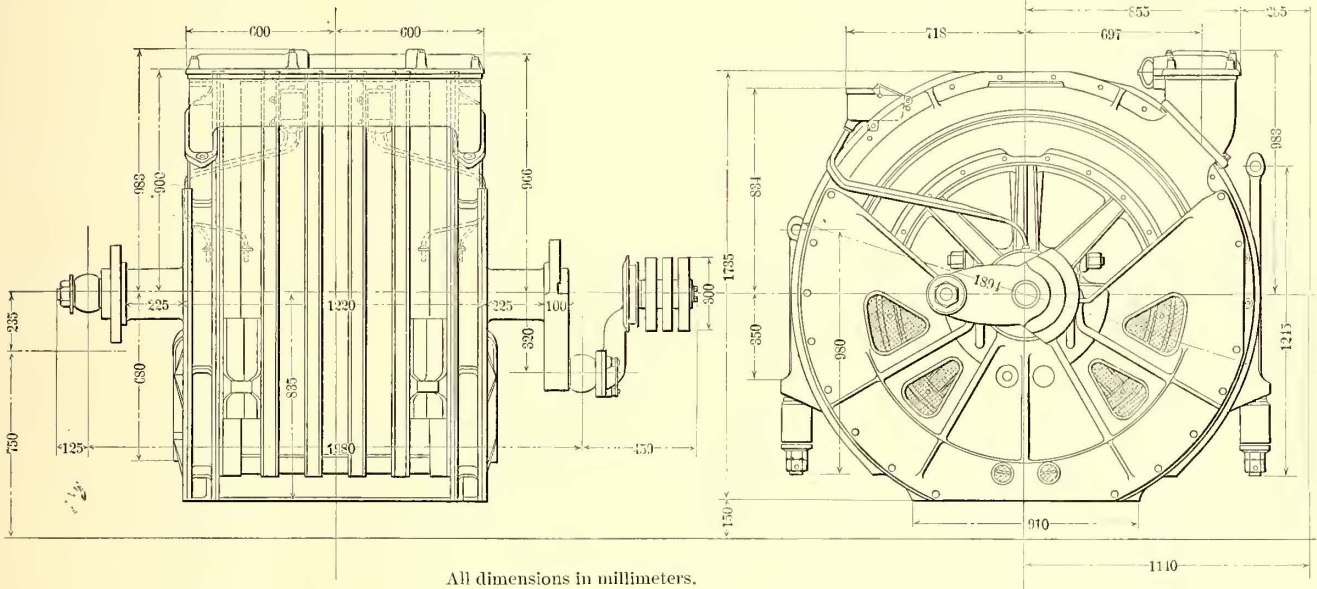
PLAN AND ELEVATIONS OF 12-POLE MOTOR
